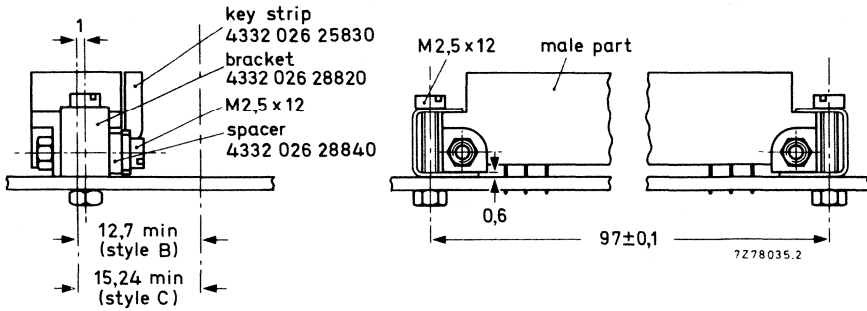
Key strip mounted to a male part with straight dip-solder pins.
